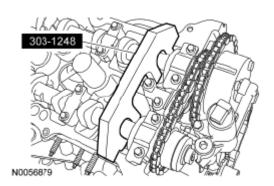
Identifying Camshaft Holding Tool Courtesy of FORD MOTOR CO.
